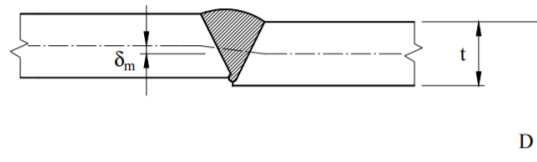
Transition in thickness at butt weld in tubular when welding only from the outside (DNV-C203 (2016)).
